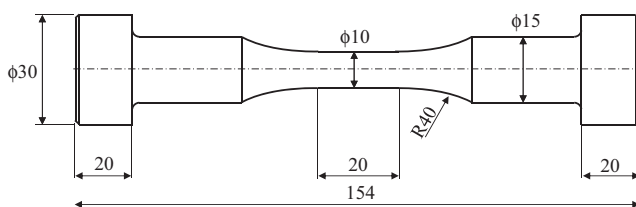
Geometry of fatigue test specimen (unit: mm).
